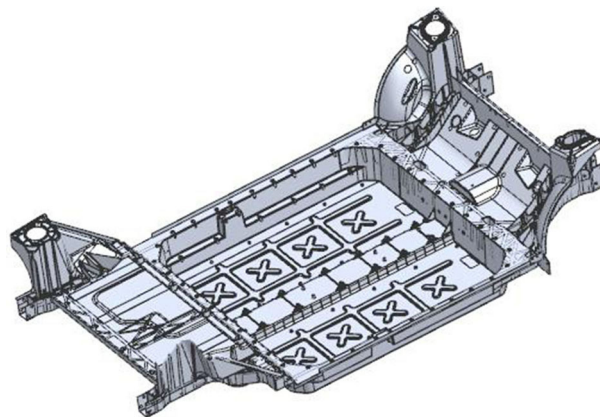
One-piece bottom car body die-casting structure in “Small Ant”
